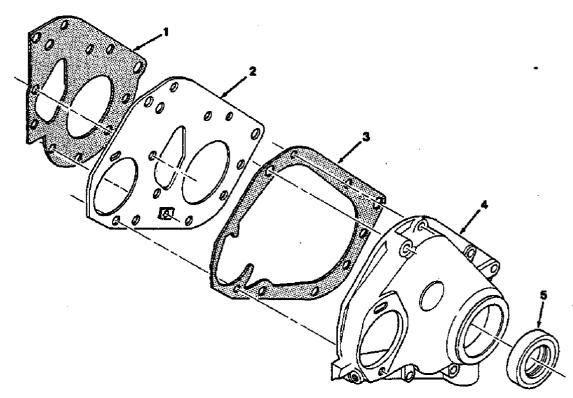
FRONT END PLATE AND GEAR COVER GROUP
